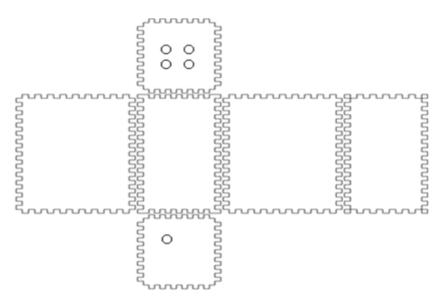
Example CAD Box Drawing, note that 5 holes will need to be either drilled or added in CAD for the voltage output leads, mechanical control potentiometer, power input and indicator LED.
